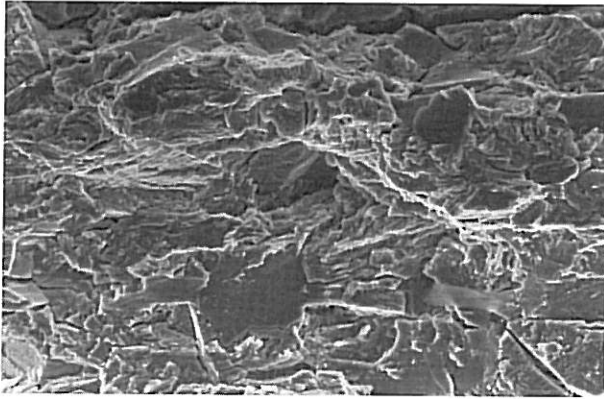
S.E.M. fractograph for a 304 austenitic stainless steel specimen strained in solution at a crosshead speed of 833 nm/s. Fractograph shows that cleavage fracture is predominant. Little plastic deformation is visible.
